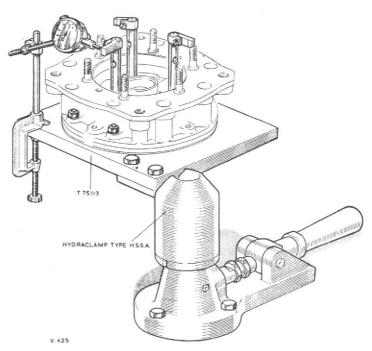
Checking the backlash between the planet gears and the annulus gear
